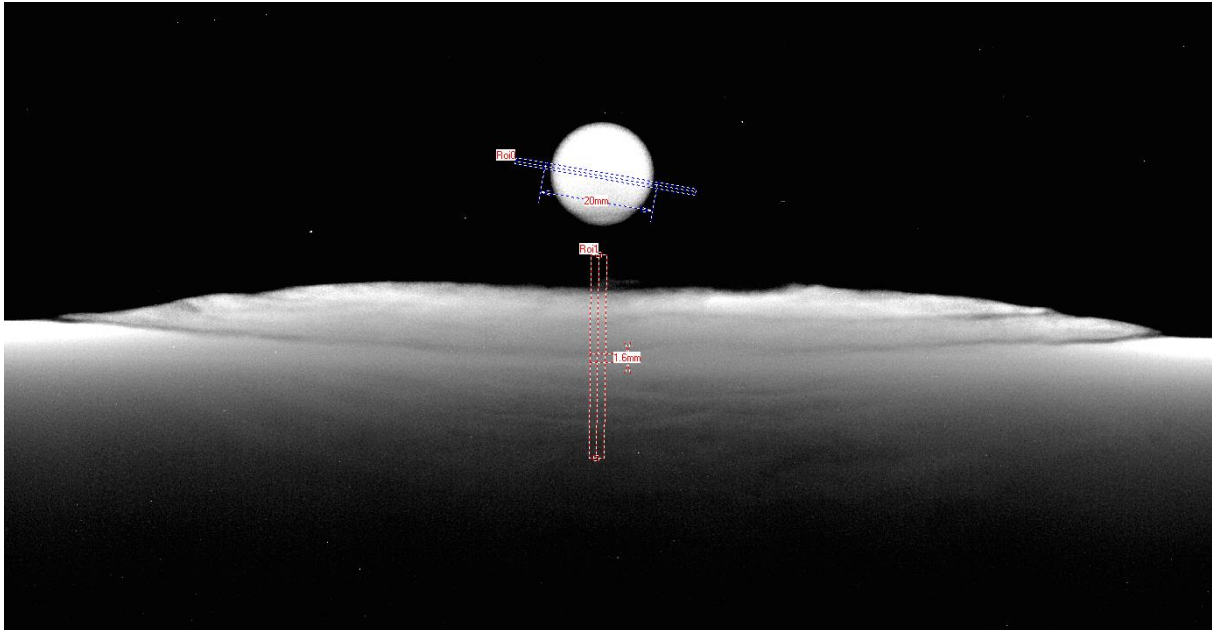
CR image of a scab on a 10" sch 20 pipe showing ball bearing comparator used for dimensional calibration and determination of the minimum remaining wall thickness (c. 1.6mm)
